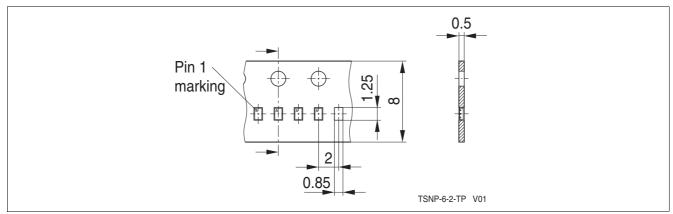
Tape & Reel Dimensions (reel diameter 180 mm, pieces/reel 15000)
